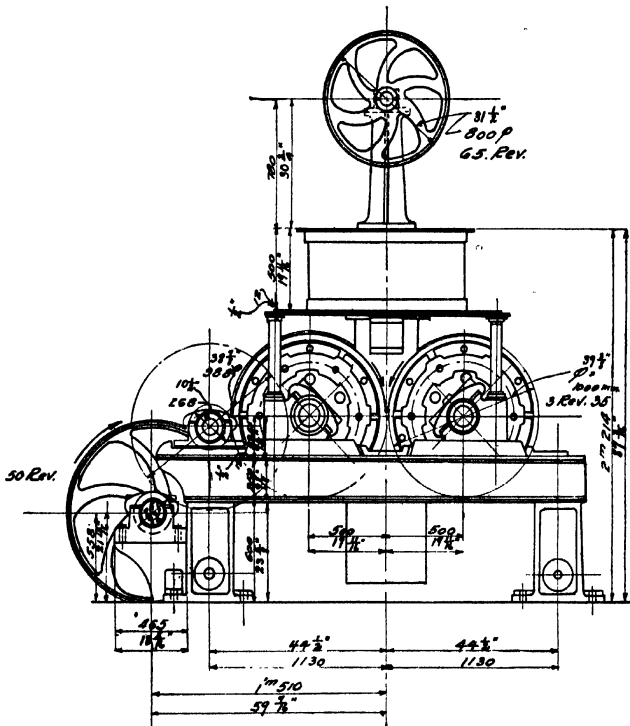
Plan and Elevation of Typical Belgian Press.
